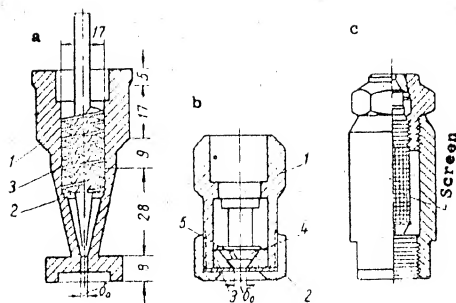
Mechanical nozzles. a, Kerting; b, Grigor'yev; c, Grigor'yev-type.
